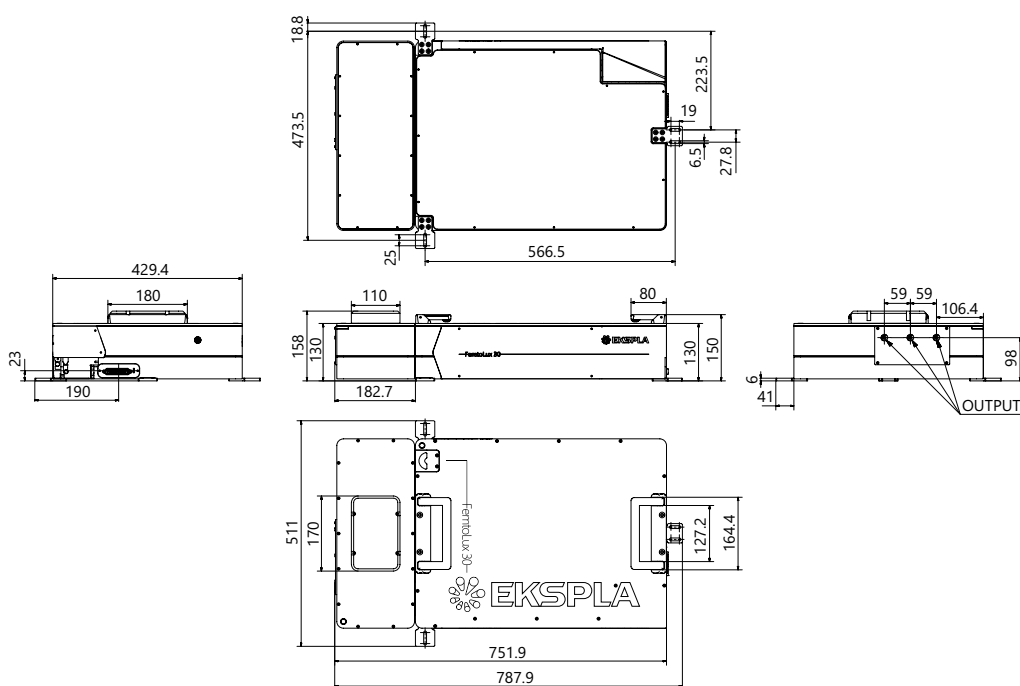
FemtoLux 30 with second harmonic option. Laser head outline drawing
